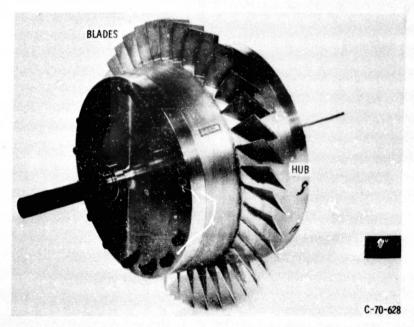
Metal compressor rotor fan stage hub and blades (ref. 1).
